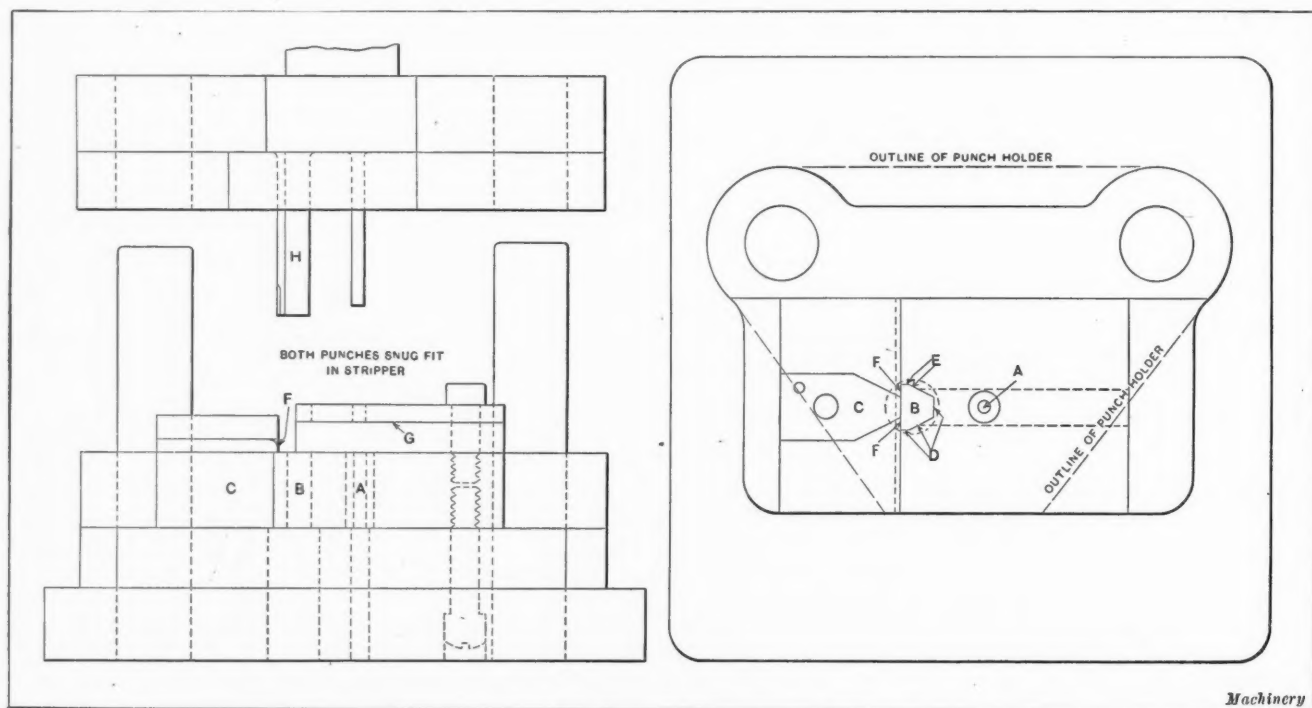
Die for forming Small Steel Piece shown in Fig. 1
